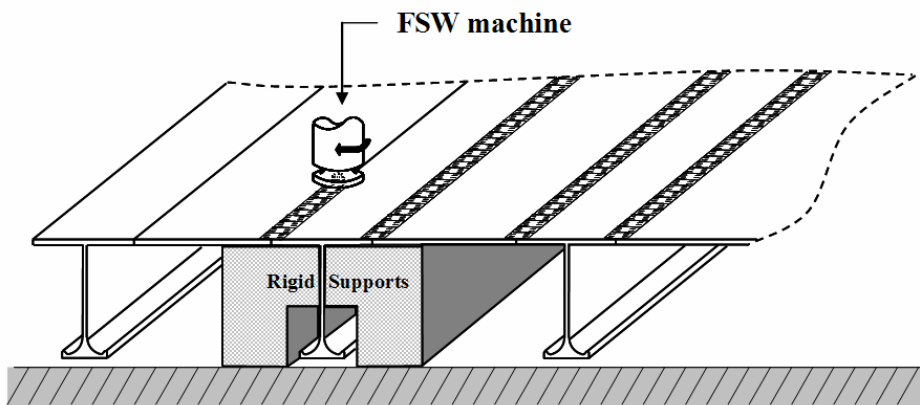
(d) Schematic of FSW for butt-joining on the plate side between the plate sheet and the extrusion (Method C-2)
